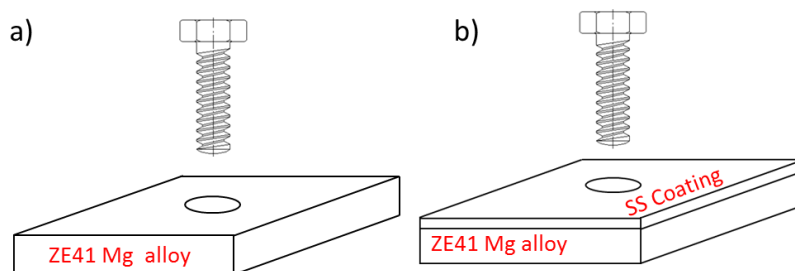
a) ZE41 magnesium alloy and b) stainless steel coating both attached with galvanized iron bolt.
